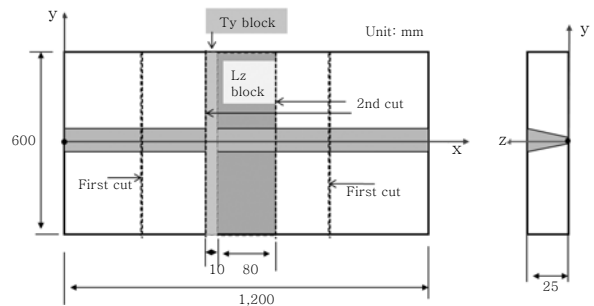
Dimension of welding specimen and cutting specimens (Ty and Lz)
